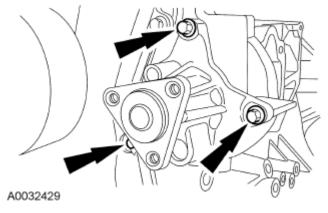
Locating Coolant Pump And Bolts Courtesy of FORD MOTOR CO.
